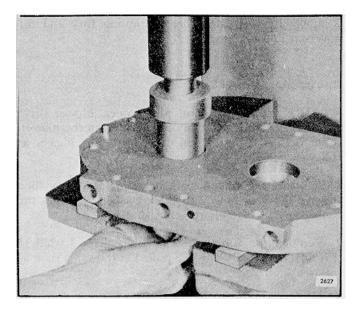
Removing Oil Seal Ring Collar and Bearing from End Plate with Tool J 6270-3
